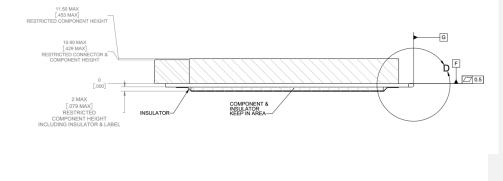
Large Form Factor Keep Out Zone – Bottom View
